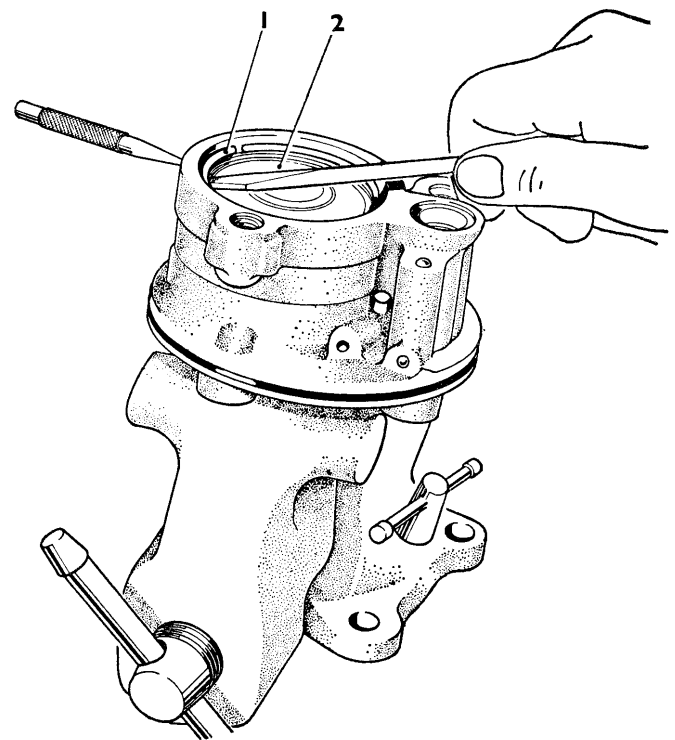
METHOD OF REMOVING END PLATE RETAINING RING
